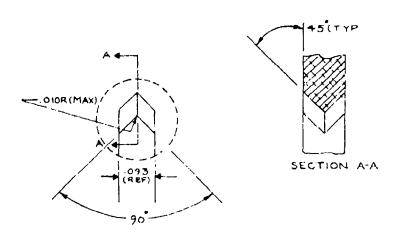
Modified Crack Propagation Specimen for ZE41A-T5 Welded Magnesium
